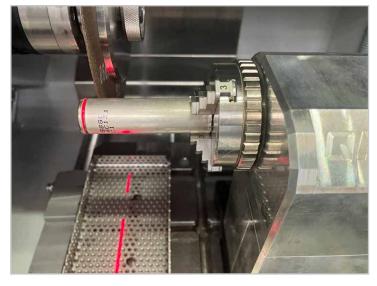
How to clamp the LIB in rotational clamping tool to cut the cap and take the jelly roll out.
